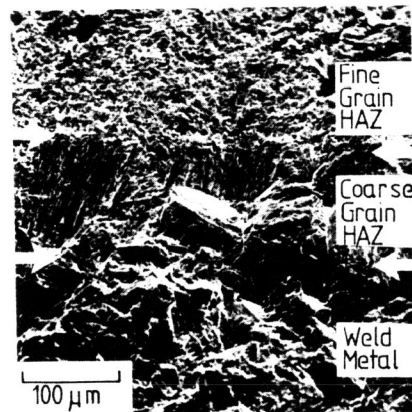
Fatigue surface: "bead-in-groove" weld specimen
